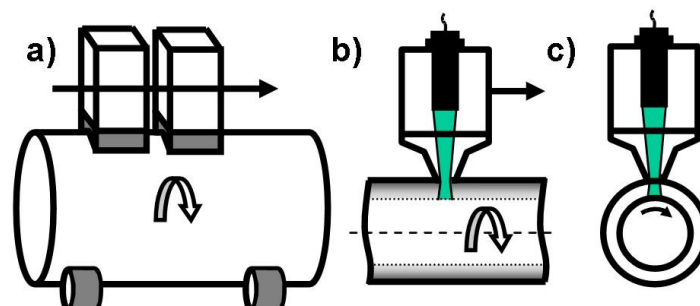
Full-Body testing and/or pipe end test with helical test traces. a) one or more probe holders move along the rotating pipe, b) straight-beam incidence, and c) cross-sectional view of full-body and/or pipe end test.
